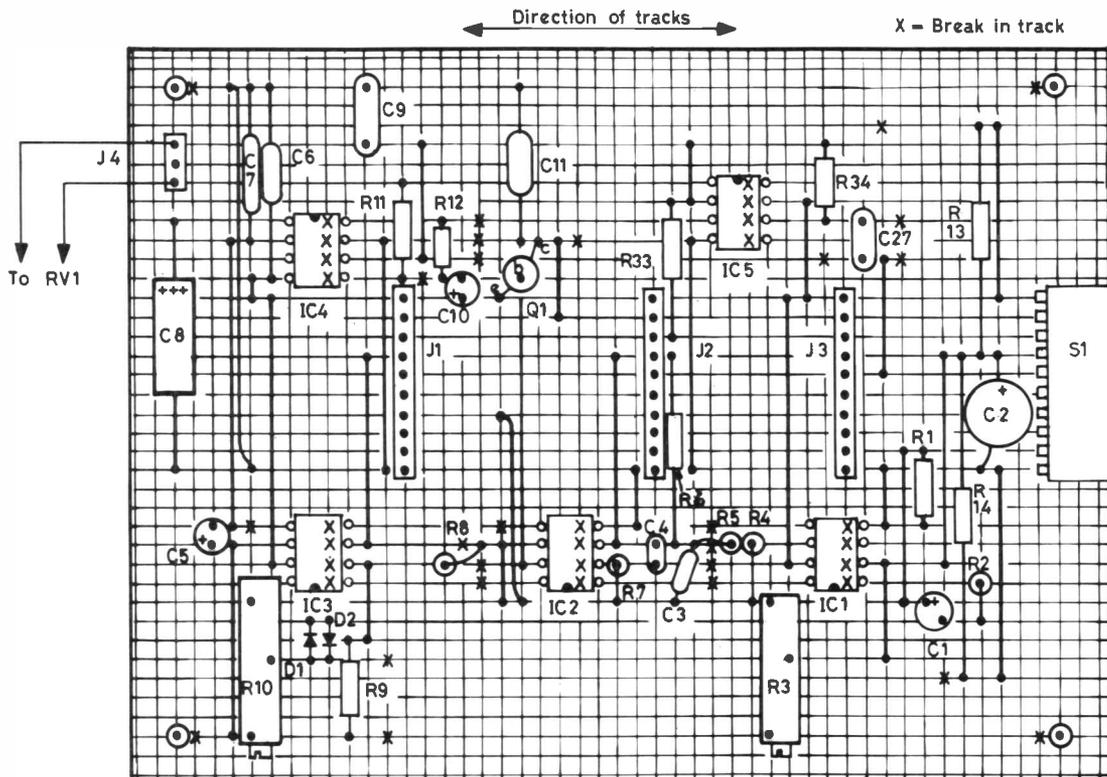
PLL /TONE DECODER MOTHERBOARD - VEROBBOARD LAYOUT (Full size)
